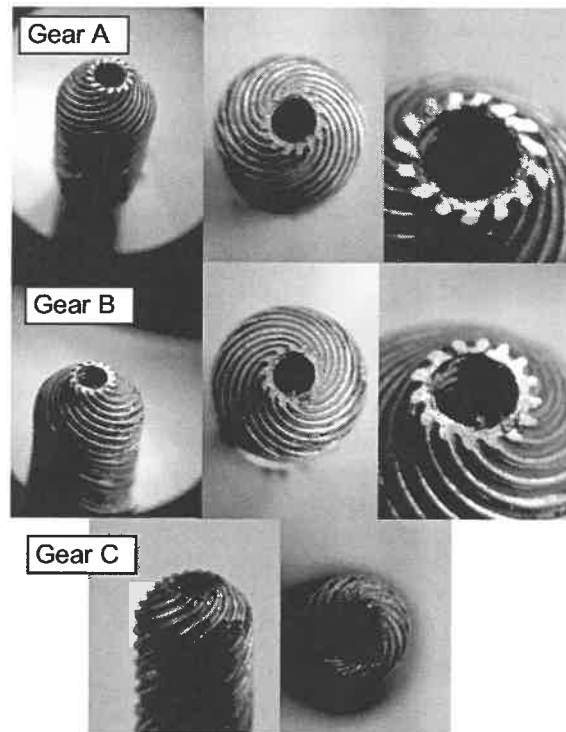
The micro spiral bevel gears utilized extra fine metallic wires.
